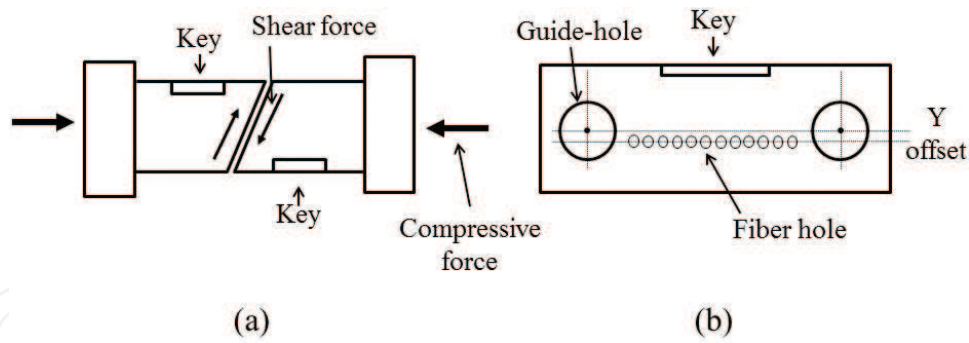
(a) Side view of connected MT ferrules and (b) MT ferrule endface in MPO plug.
